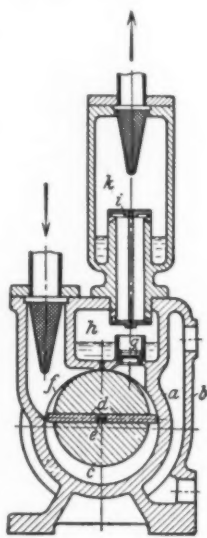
STAMP TWO-CELL ROTARY-PISTON COMPRESSOR
